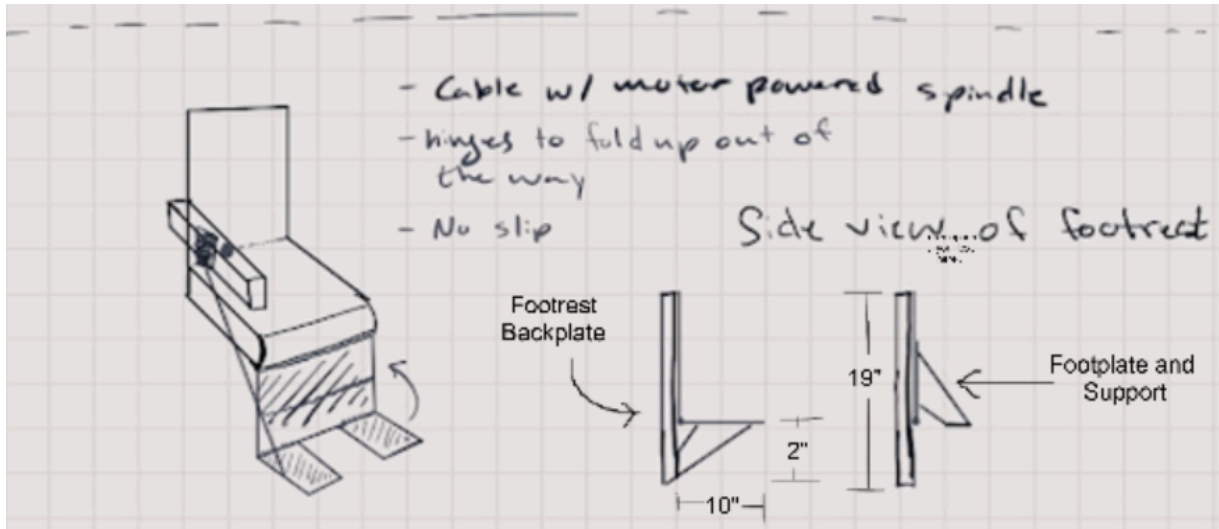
Hand Crank Panel Footrest Initial Design and Collapsing Mechanism
